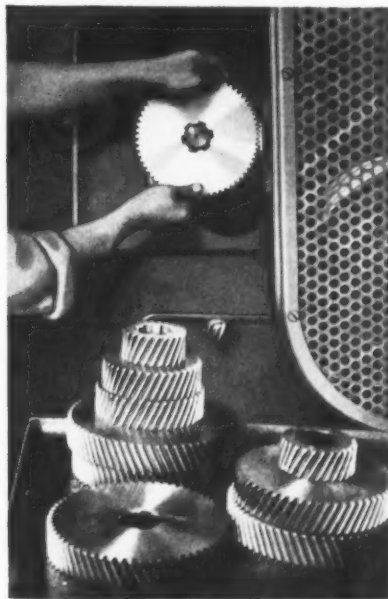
Easily Accessible Change-gears on Acme-Gridley Automatic
